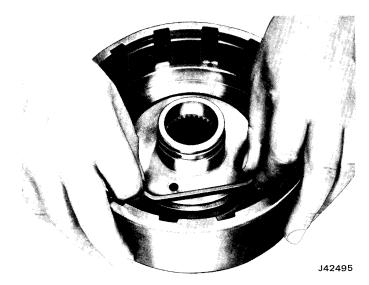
Installing Forward Clutch Housing Center Piston Seal
